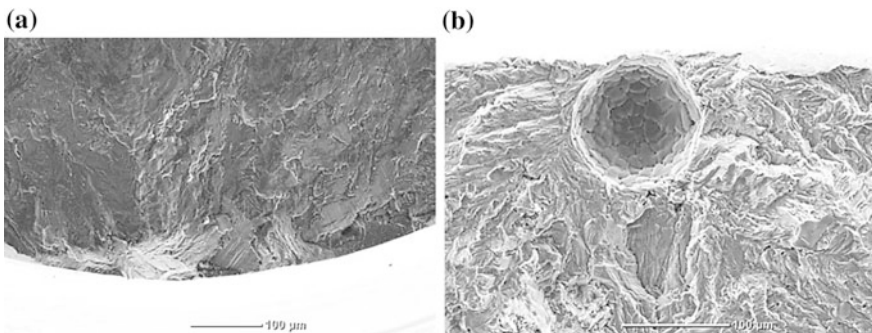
SEM images of fracture surface a Surface-initiated fracture. b Defect-initiated fracture from pore at surface (size approx. 100 μm)
